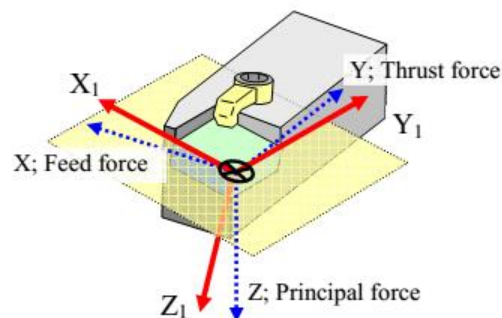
Machine coordinate and tool coordinate in turning [18]
